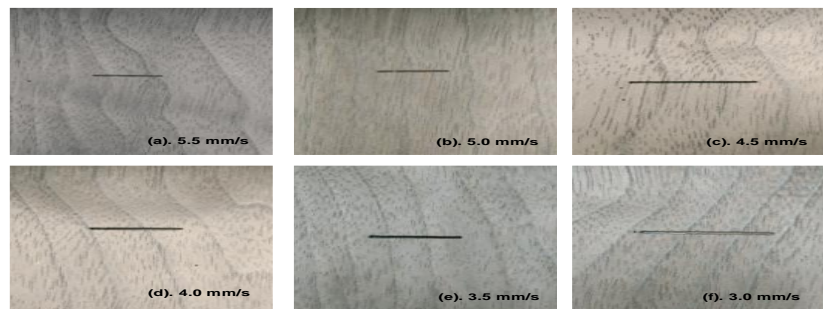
Black walnut veneer cut surfaces at different laser cutting speeds under the machining condition of S₂
